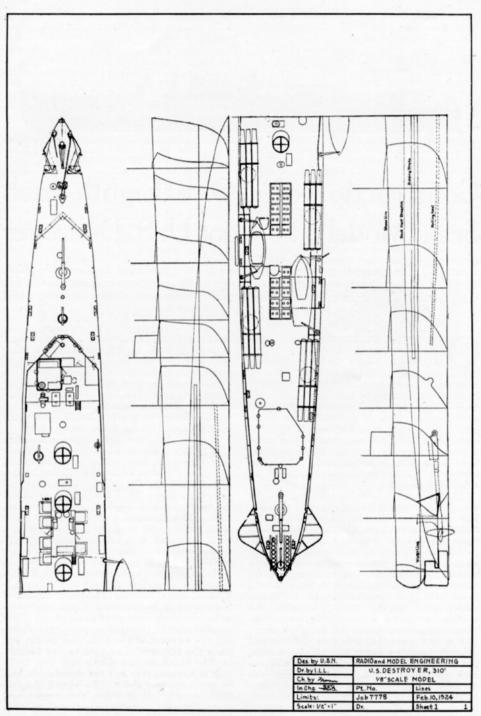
One-fourth scale drawing of the destroyer hull. Dimensions on this drawing must be multipled by 4 to give the correct sizes for a $\frac{1}{8}$ -in. scale model
